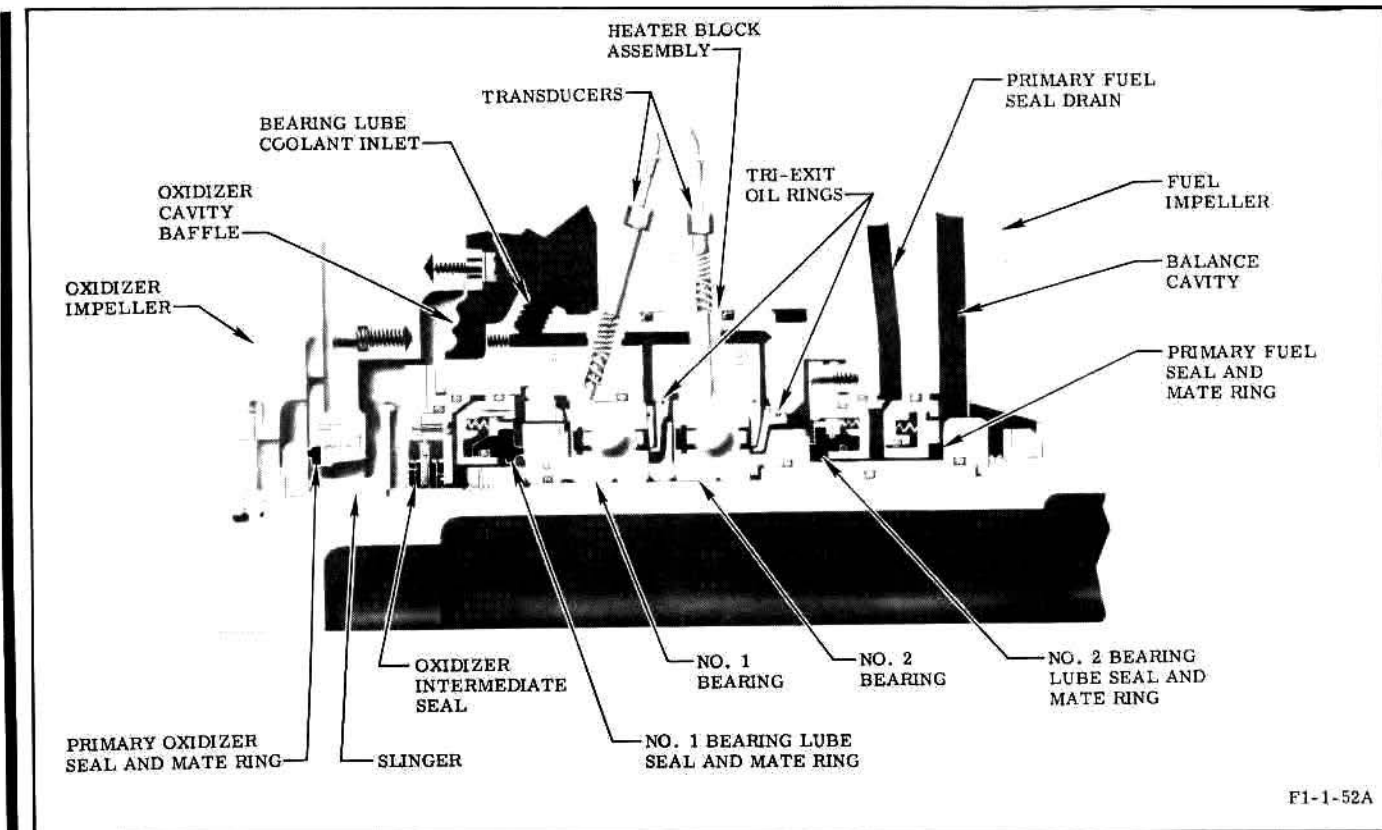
Oxidizer Pump and Fuel Pump Bearings
